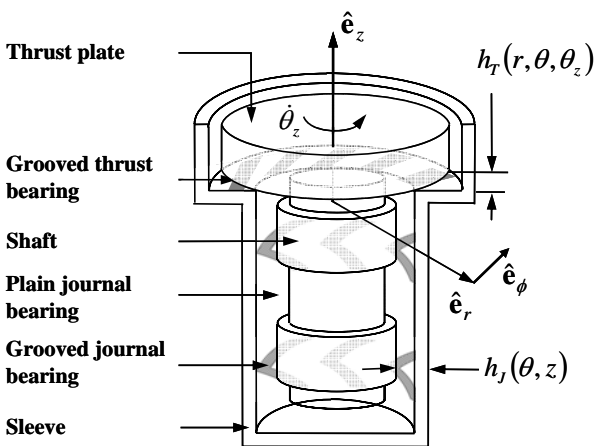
Cylindrical coordinate of the coupled journal and thrust bearings in a HDD
